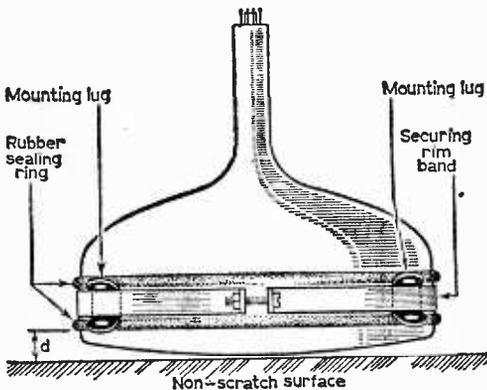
When fitting replacement tubes secured by rim bands always check distance "d" as well as the location of the mounting lugs.
